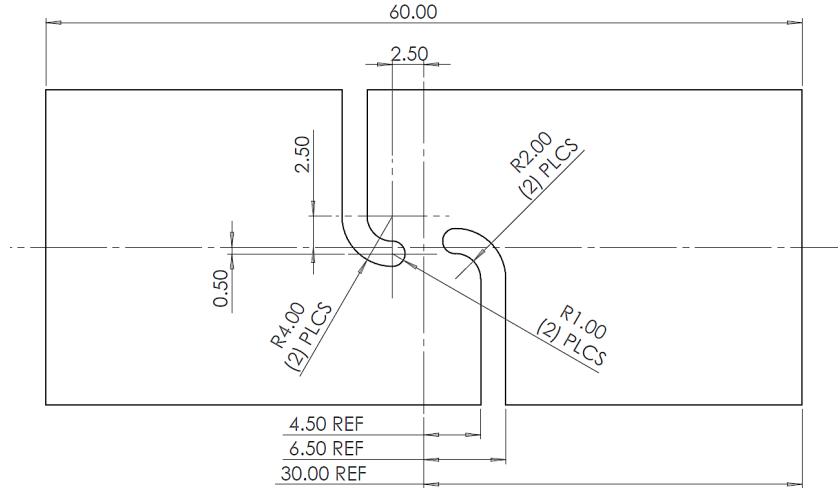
Modified mini-shear specimen. Dimensions in millimeters.
